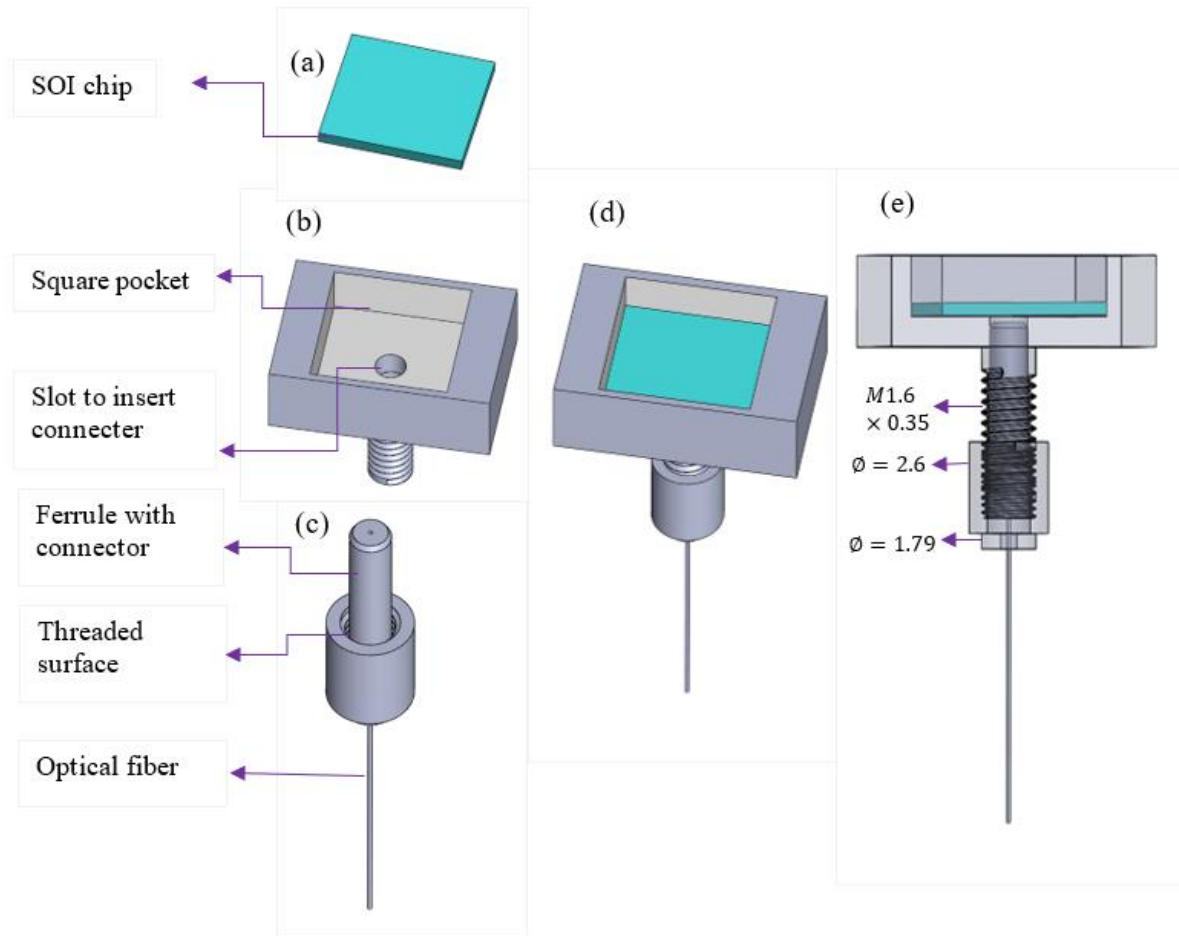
The packaging assembly: (a) the SOI chip, (b) the housing, (c) the connector with the optical fiber inserted in the ferrule, (d) a full isometric view of the packaging and (e) a transparent view of the assembly with dimensions in mm.
